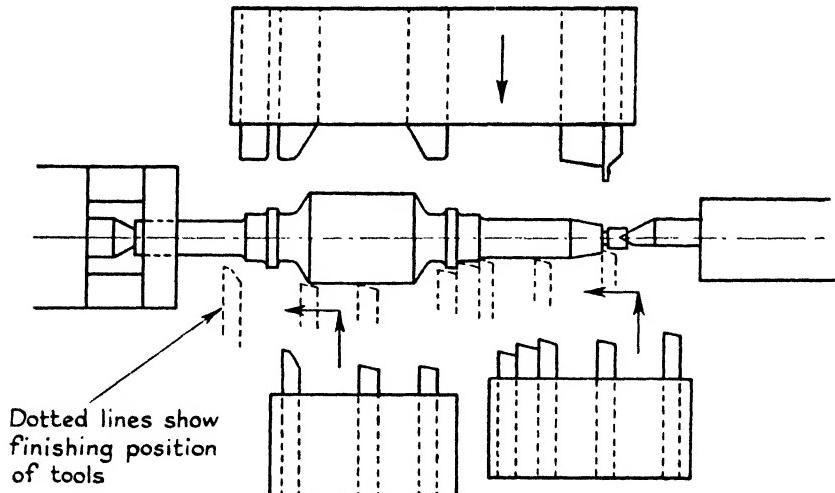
MULTI-CUT LATHE TOOL LAY-OUT FOR WORM SHAFT
